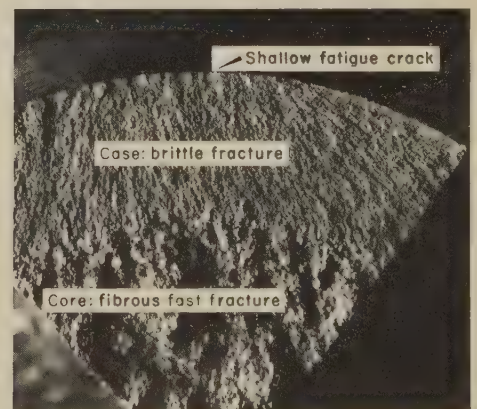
Locating the origin of a torsional-fatigue fracture in a high-hardness steel music wire spring
